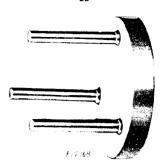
Tool No. T-4332 for Removing Ball Bearing from Driving Wheel
